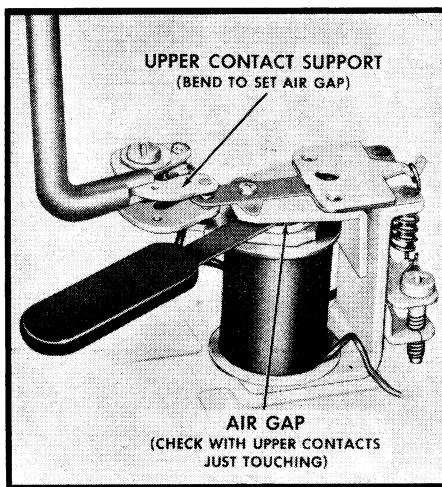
Checking and adjusting Delco-Remy dual contact voltage regulator armature air gap
